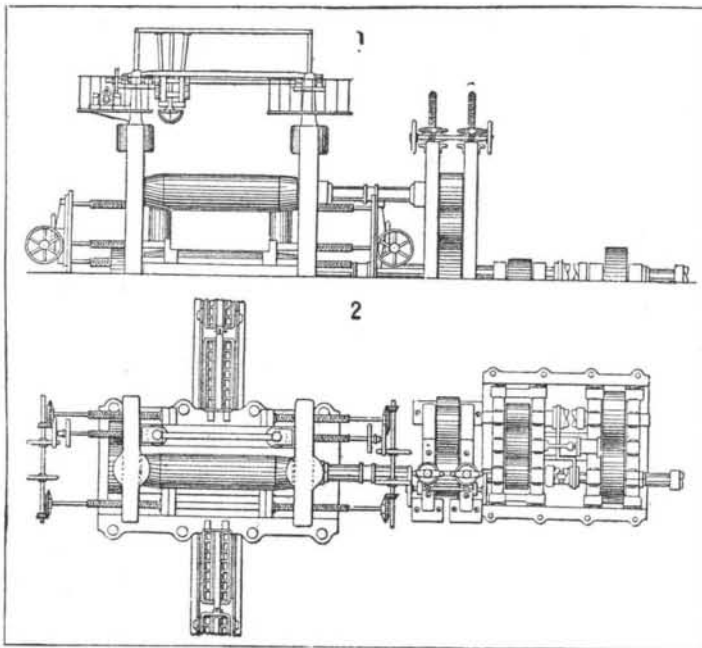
ELEVATION AND PLAN OF THE ST. JACQUES ROLLING MILL.
